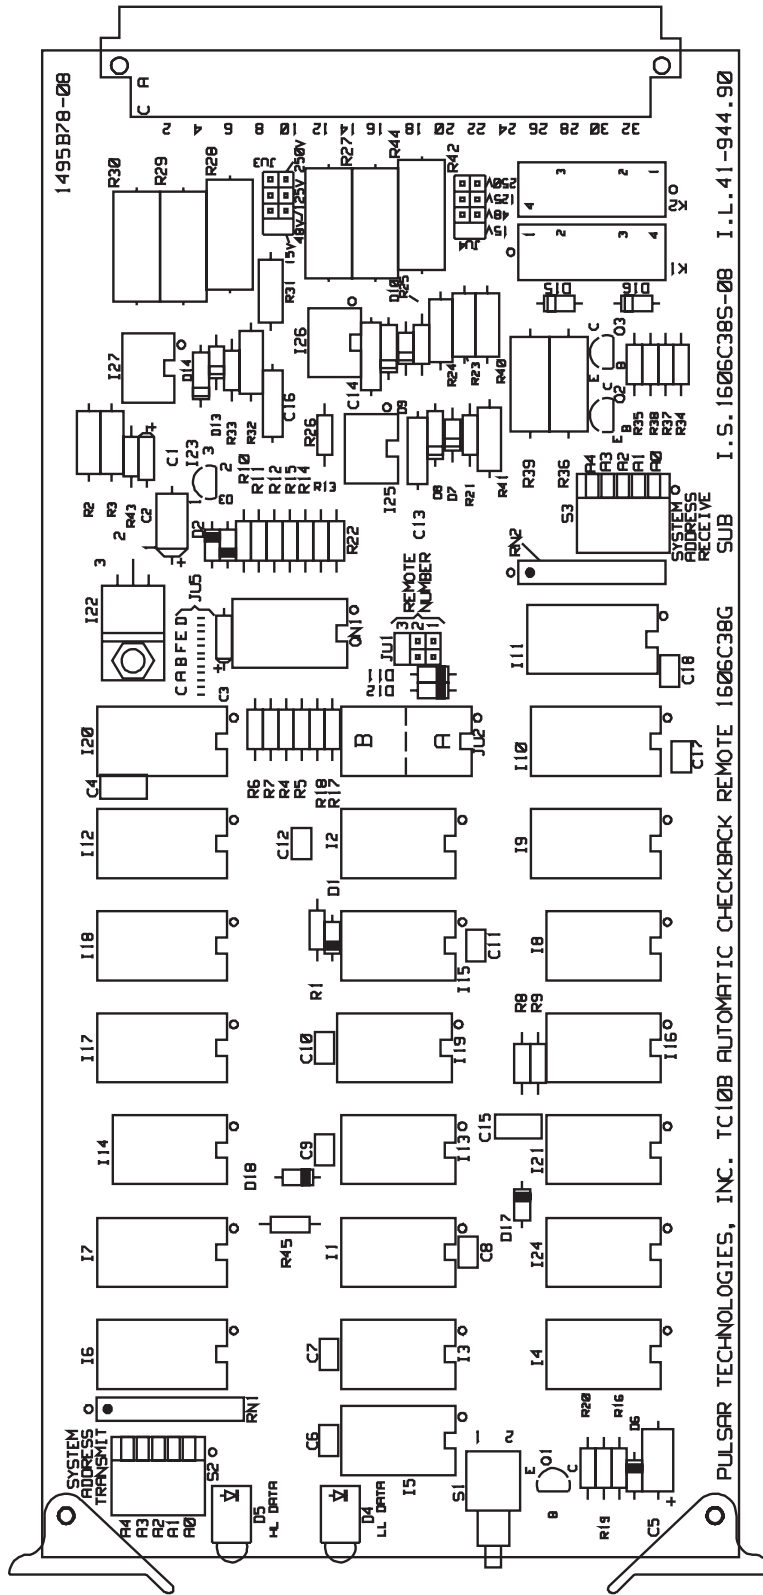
Automatic Checkback PC Boards. — Remote Board. (1495B78)
